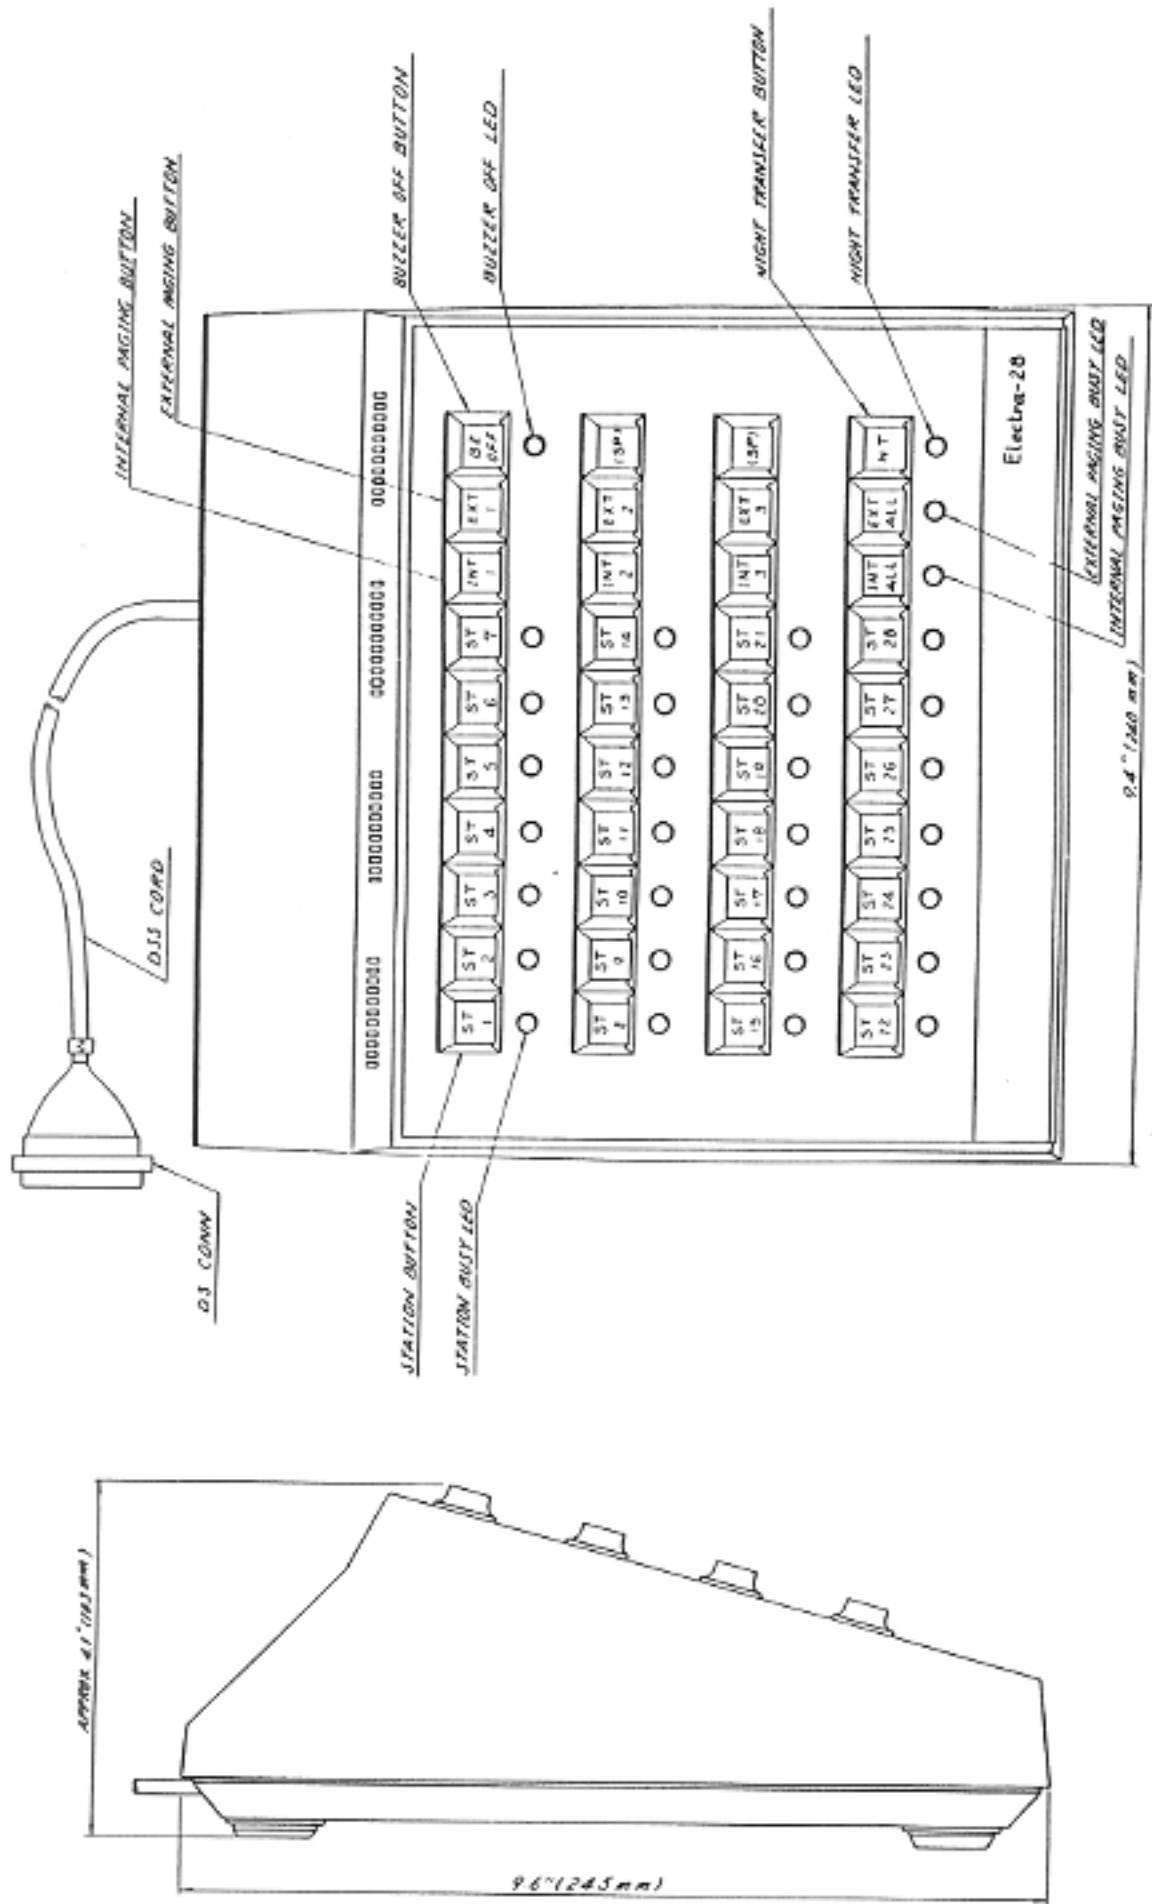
ED-28-2 DSS/BLF Console Outside View
